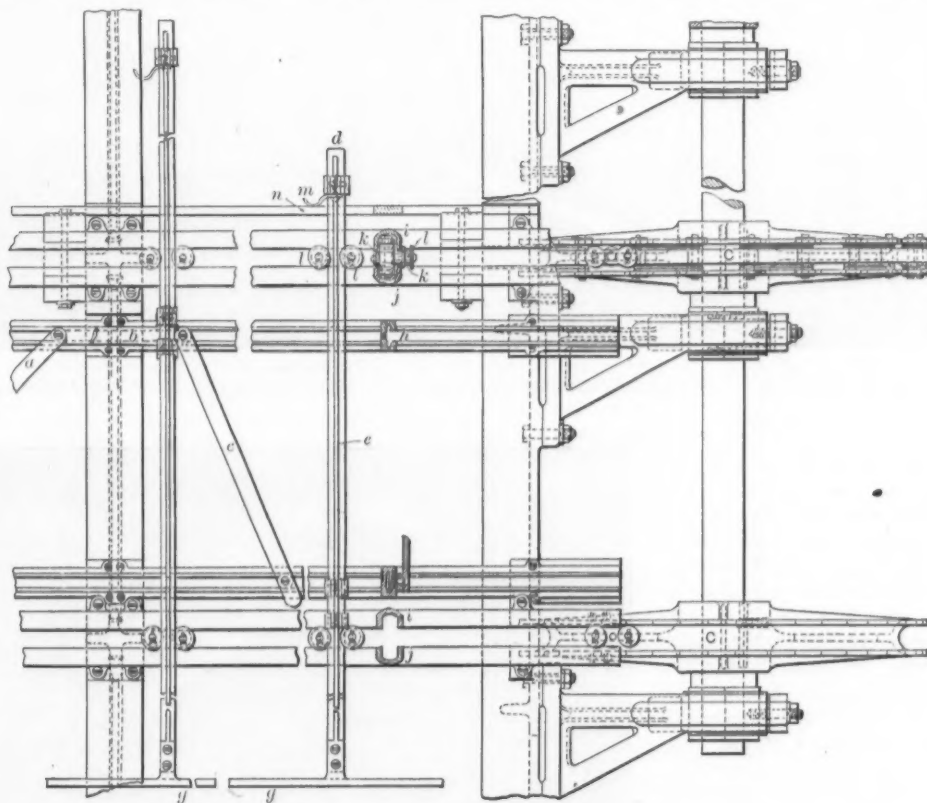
Elevation, Showing Workholder and Details of Chain Carrier.
